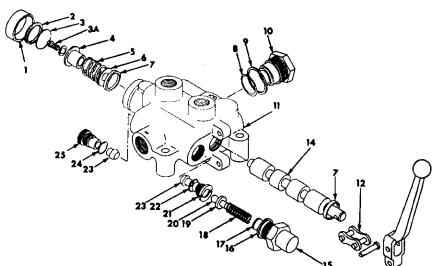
Exploded view of the remote control valve which can be mounted on the scuttle plate (lower instrument panel) on Series B-275 and early Series B-414 tractors.
